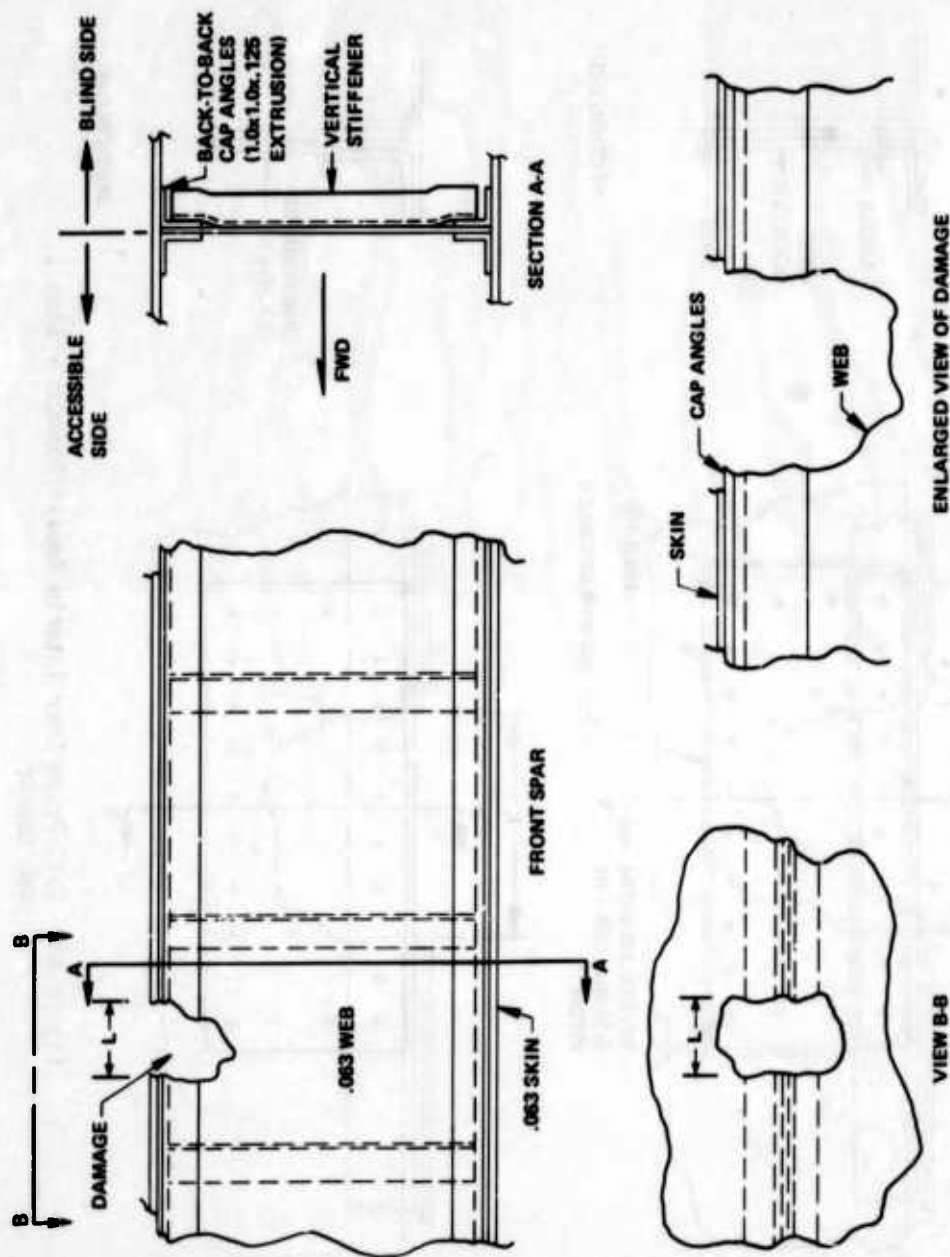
Tail Pylon Spar Interim Repair Concept - Assumed Area and Extent of Damage
